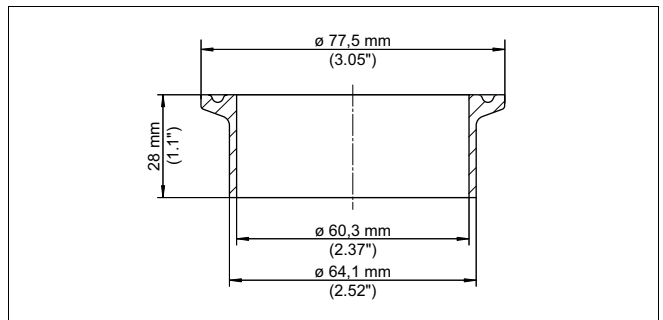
Dimensions welded socket 2½" PN16 (ø 77.5 mm) DIN 32676, ISO 2852/316L
